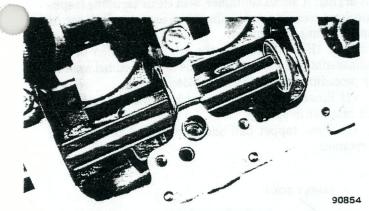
B-14 Removing Center Camshaft Bearing—Typical
